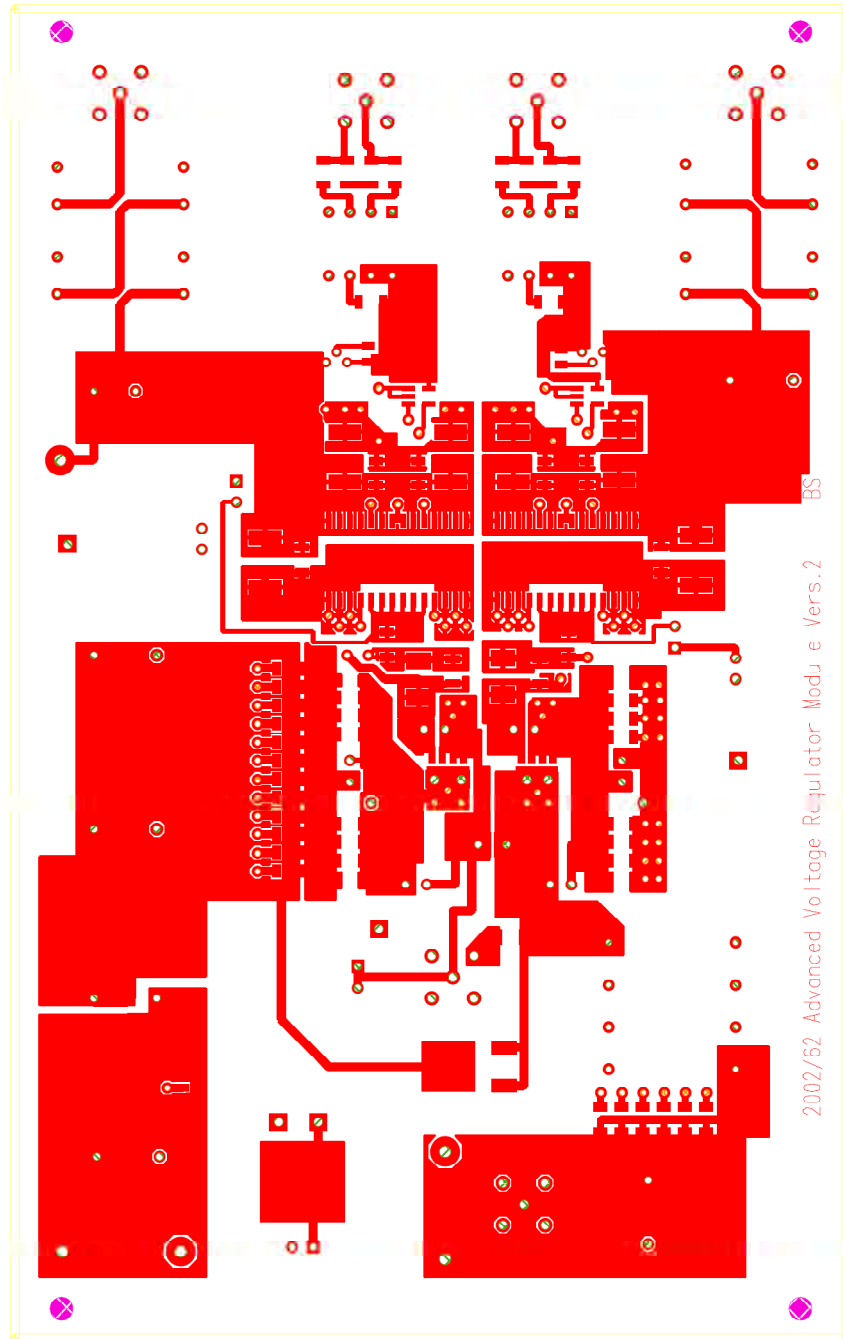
PCB design of top layer corresponding to the test board of Figure G.1.1.
